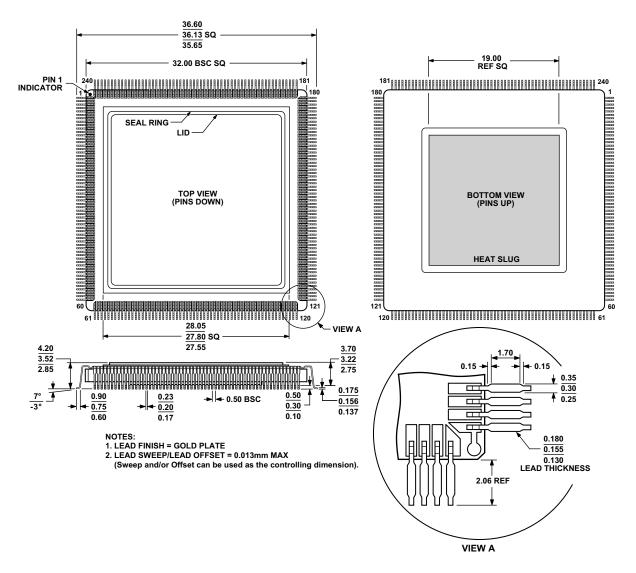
240-Lead Ceramic Quad Flat Package, Heat Slug Down [CQFP] (QS-240-1A) Dimensions shown in millimeters
